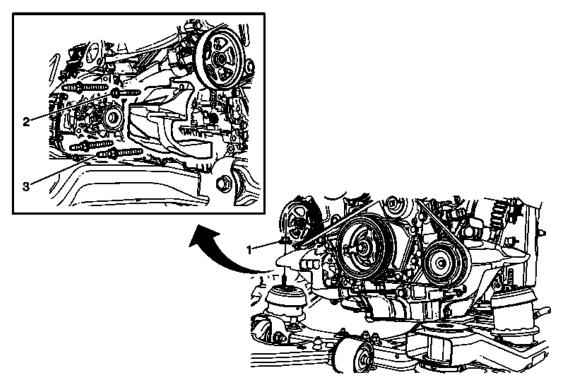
Identifying Engine Rear Mount Bracket Courtesy of GENERAL MOTORS COMPANY
